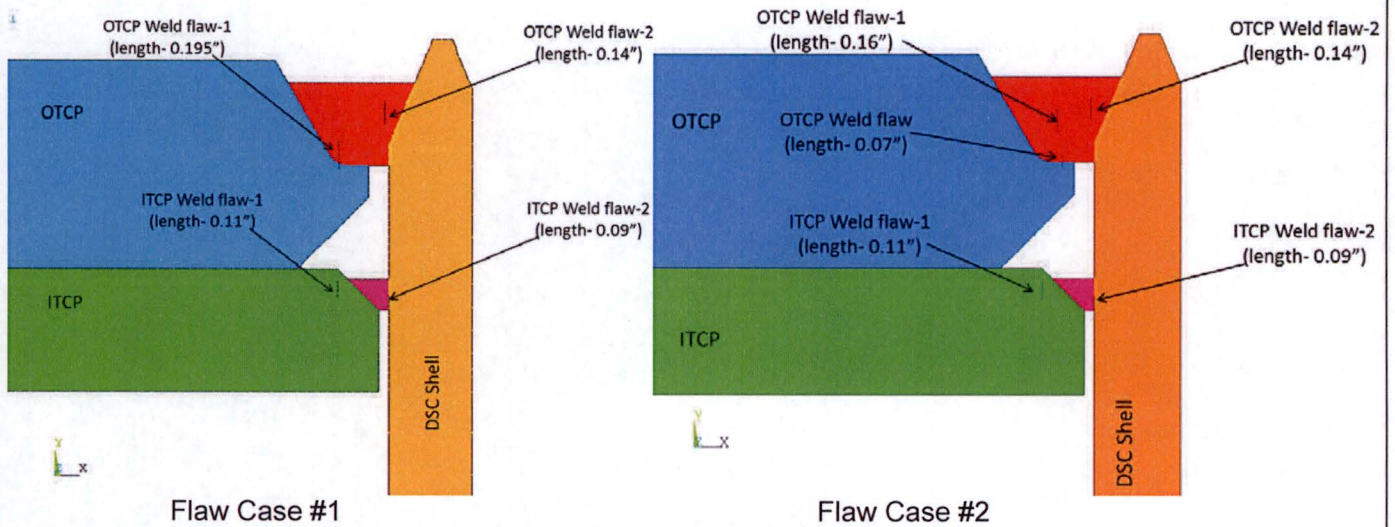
Weld Flaws in Original Model (Ref. [5.3])
